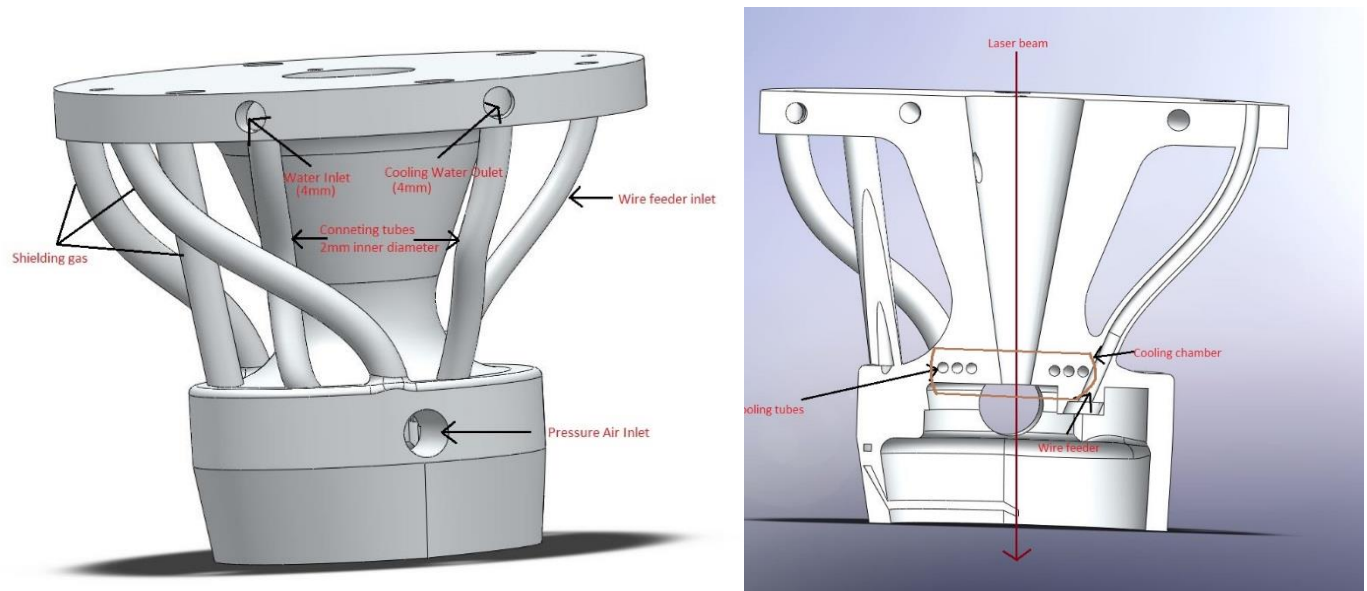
(a) Design 4 model (b) Section view with cooling chamber.
